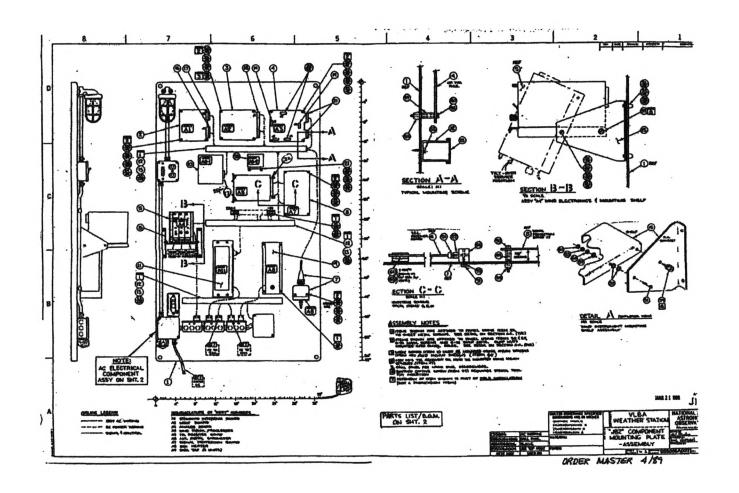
is the VLBA Weather Station Equipment Enclosure Mechanical Drawing, C55006M001. It is the mechanical drawing for the enclosure. Figure 16 is the VLBA Weather Station "JB2" Component Mounting Plate Assembly, D55006A007. It is the assembly, layout and part list for the panel mounted assemblies inside the electronics enclosure.
